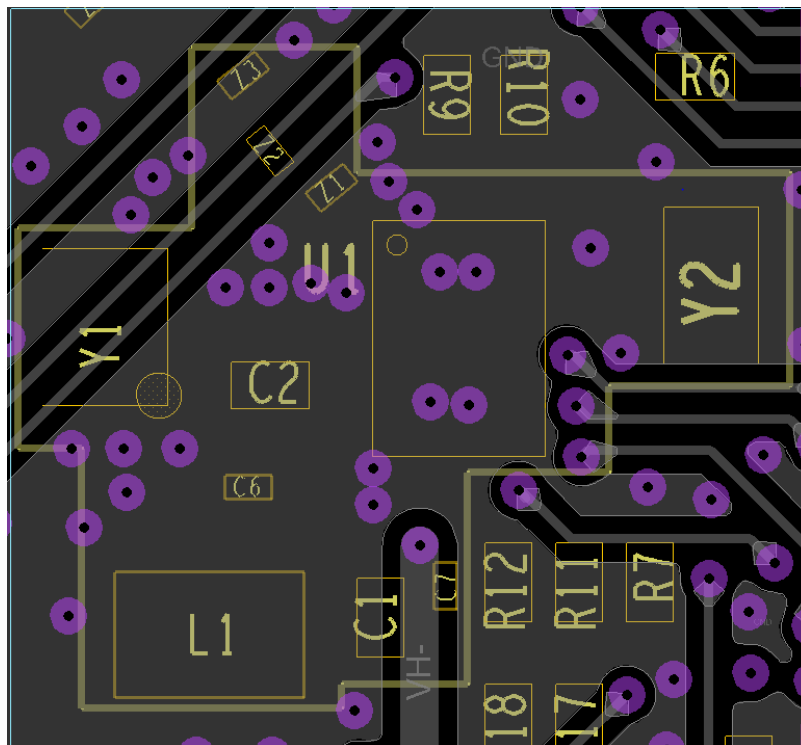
FCGQFN24 PCB Placement and Routing – INT2 Layer
